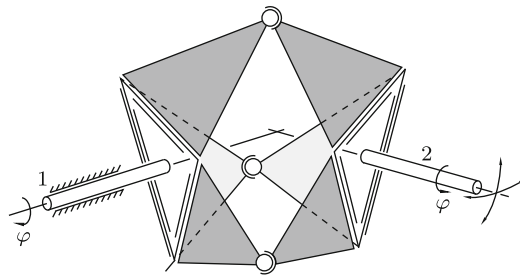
Clemens coupling with three identical parallel chains RSR
